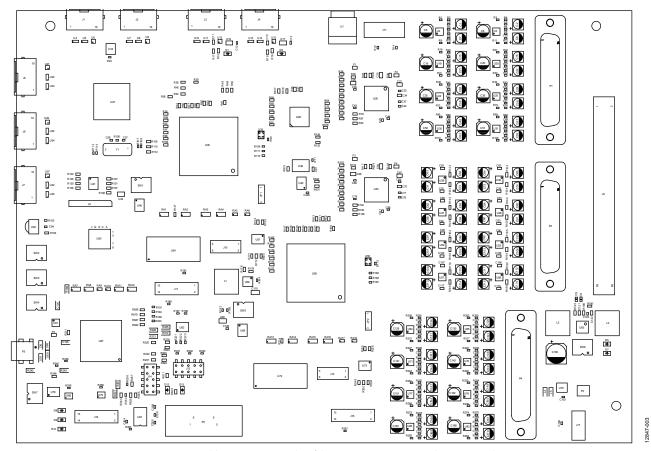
Assembly Drawing (Top Side) of the EVAL-MELODY-5 Printed Circuit Board (PCB)
